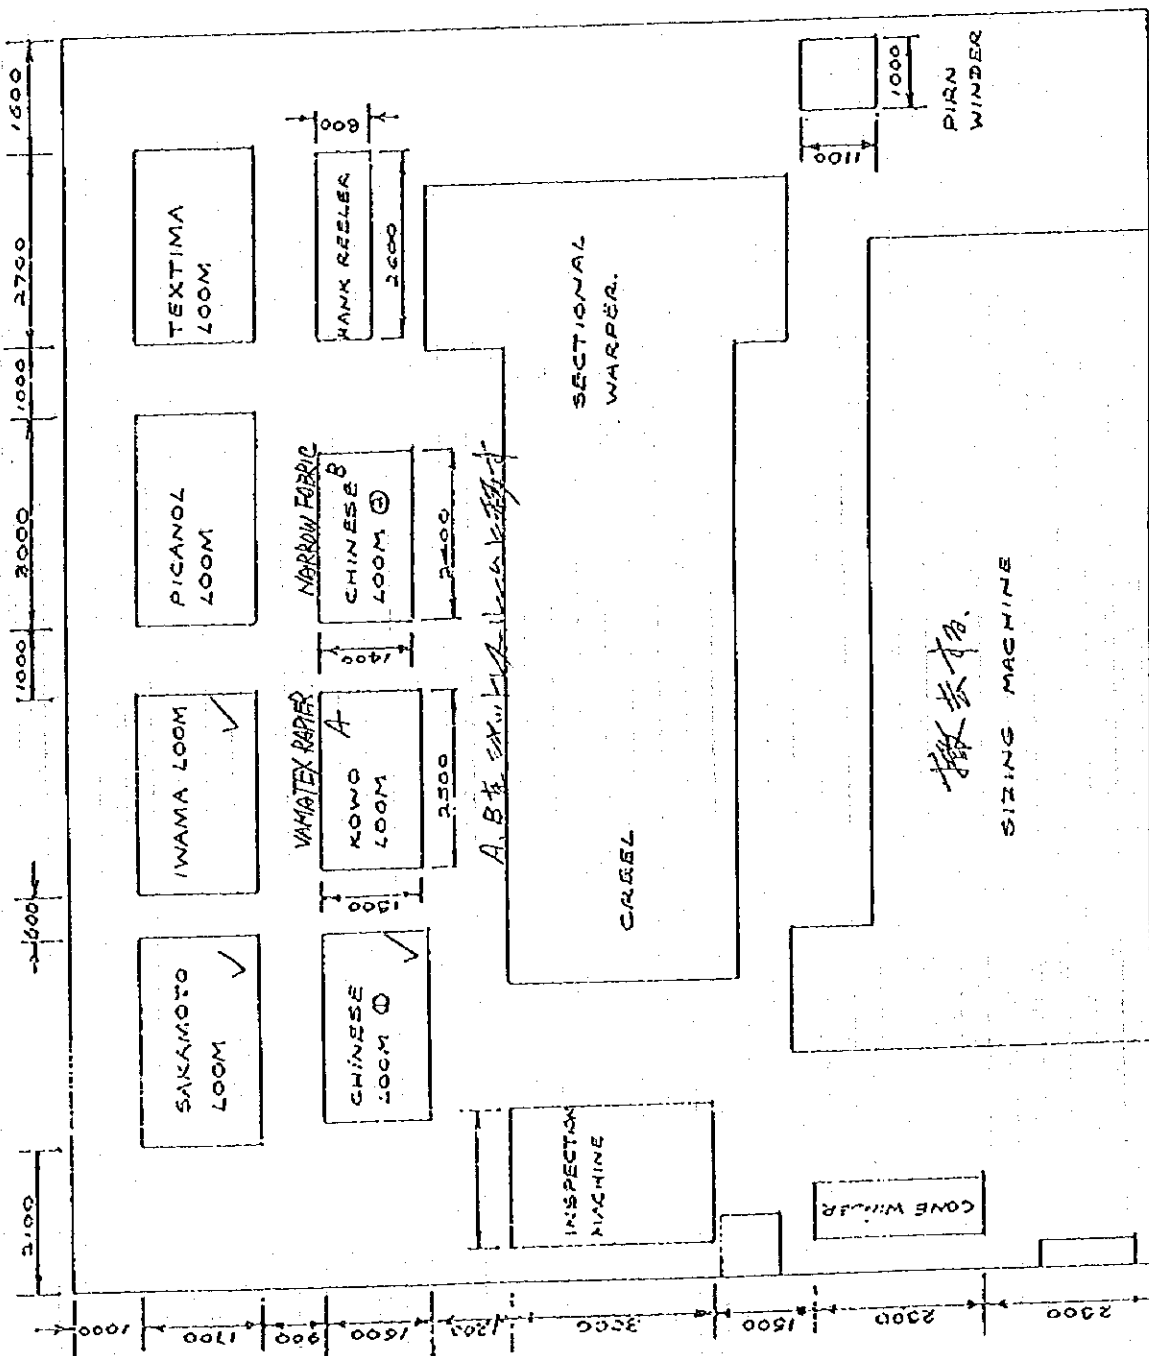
PROPOSED LAYOUT OF WEAVING WORKSHOP
